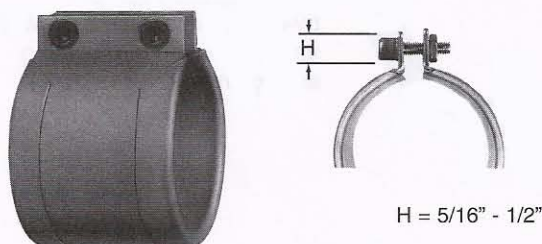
Mounting Flange Ears - a secondary means for mounting where a built-in method is preferred. With 5/16" Socket Head bolt. Consult factory for lead wire exit when used with Fig. 1
